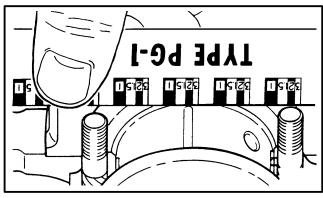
MEASURE THE PLASTIGAGE® ON A BEARING JOURNAL
